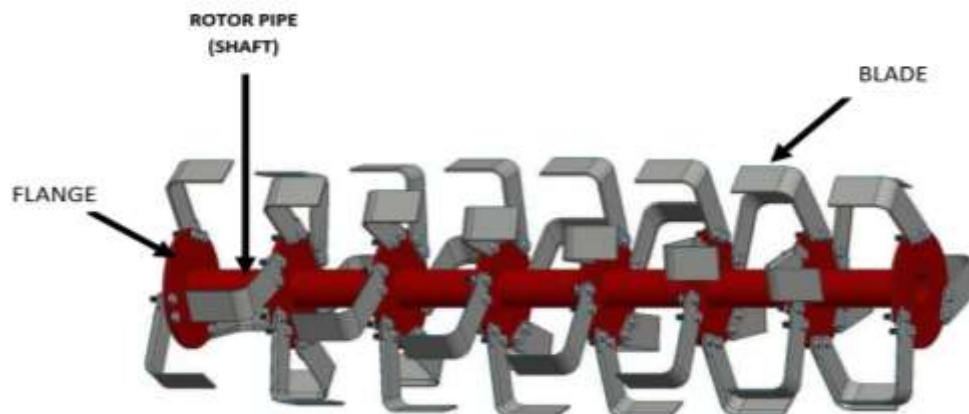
Rotor shaft assembly of 5-foot Raj rotavator (Mr. S. A. Mishra, 2015).
